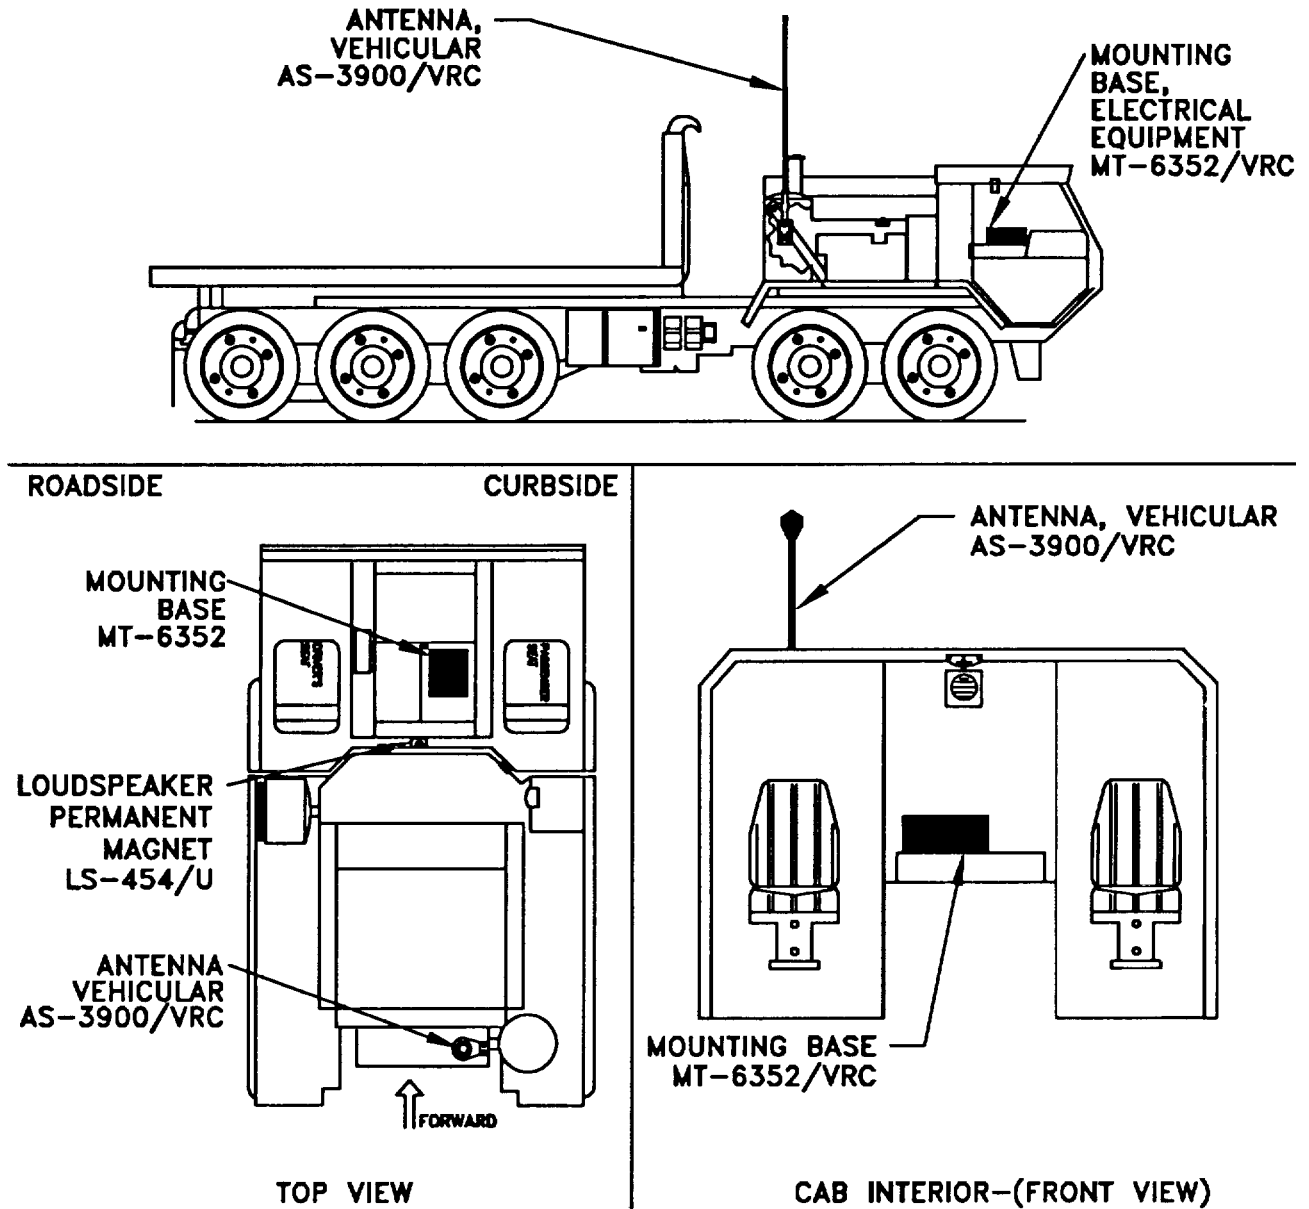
(1). MK and Radio Installation: MK Equipment Locations
